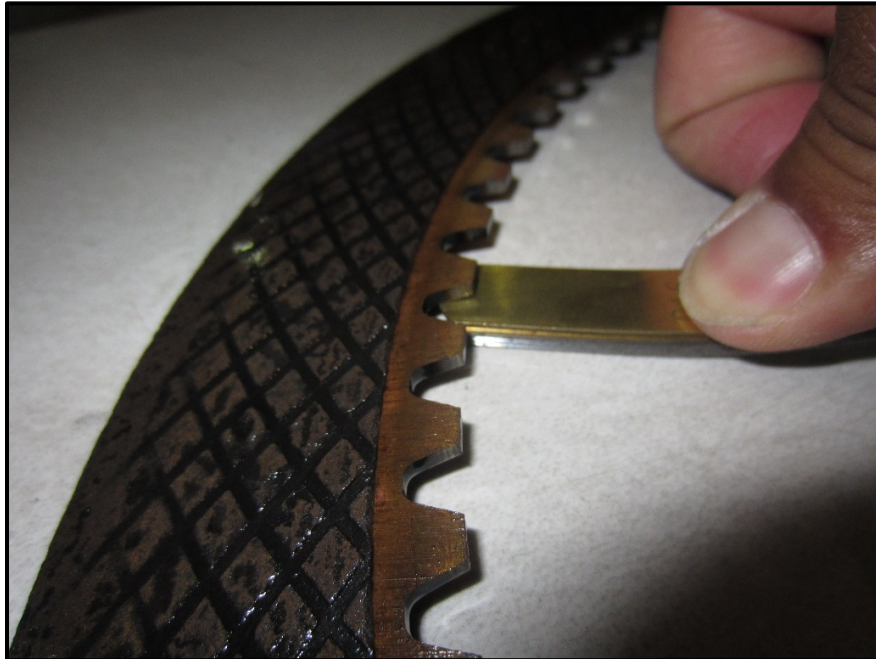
Brake pack friction element coned (deformed) due to heat.
